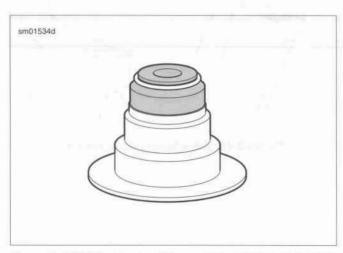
Valve Seal and Lower Valve Collar Assembly (seal and lower collar replaced as assembly only)
